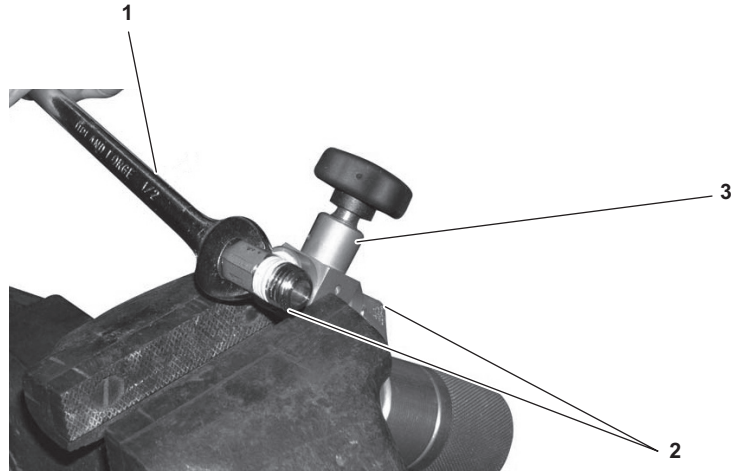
Removing Elbow Fittings from P1 Bleed Valve
